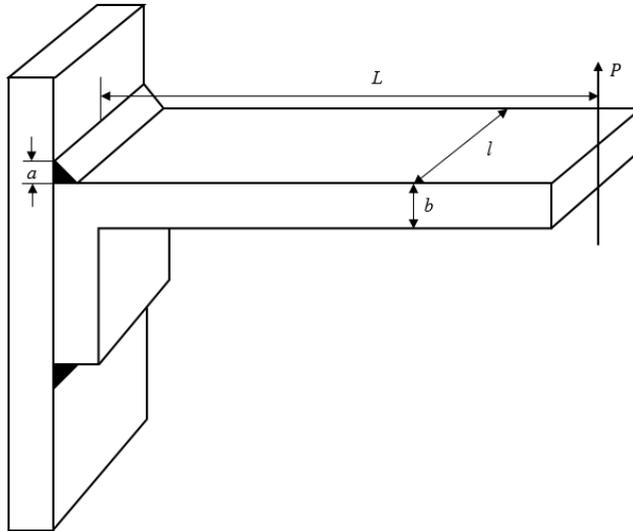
Simplified welding part sketch  $\alpha = 5^\circ$ .
